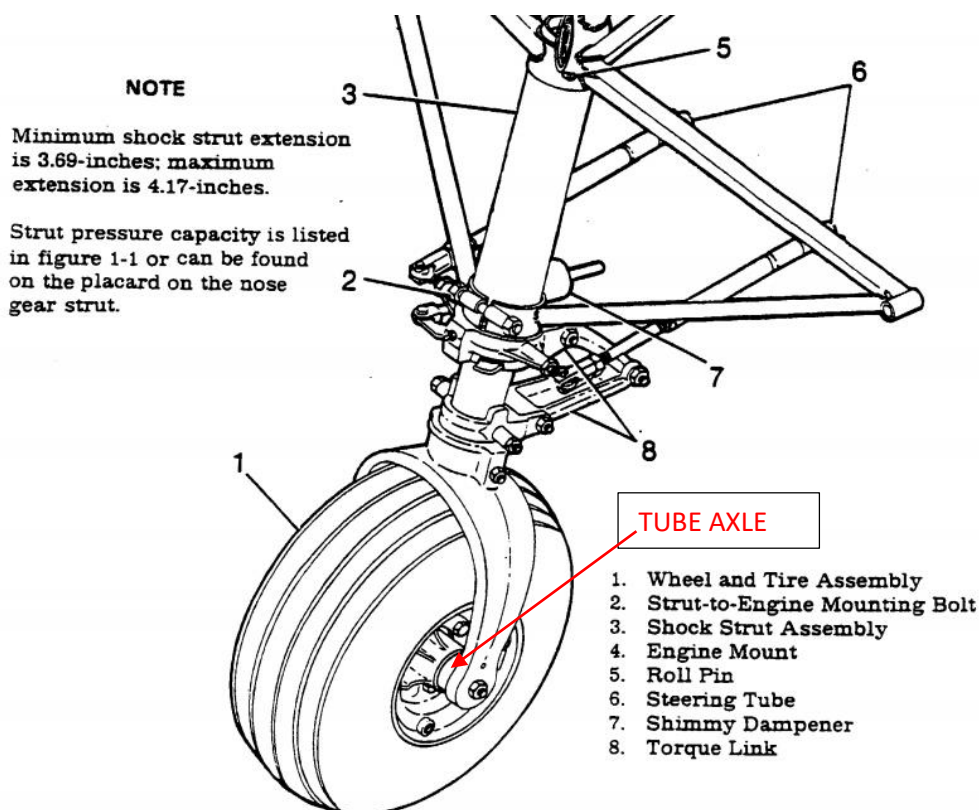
Cessna FA 152 Aircraft Nose landing Gear Assembly
